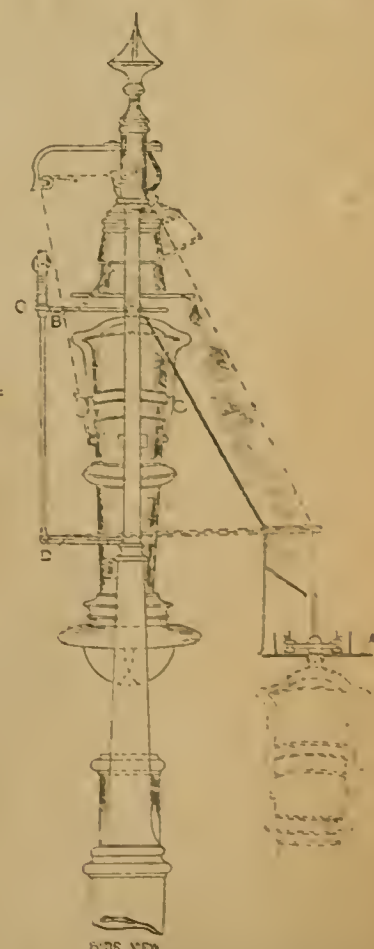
CENTRAL CARRIER LOWERING HEAD.
